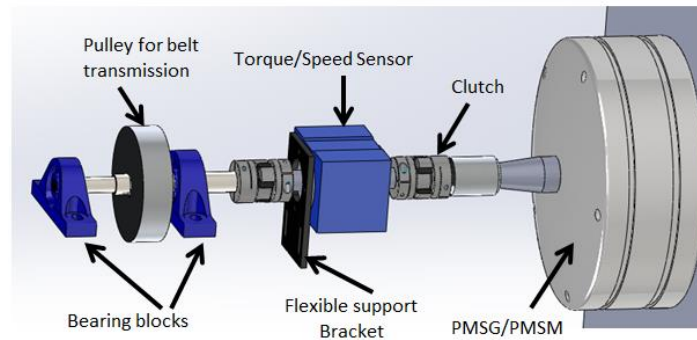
16: Generator and Torque/Speed Sensor Assembly
